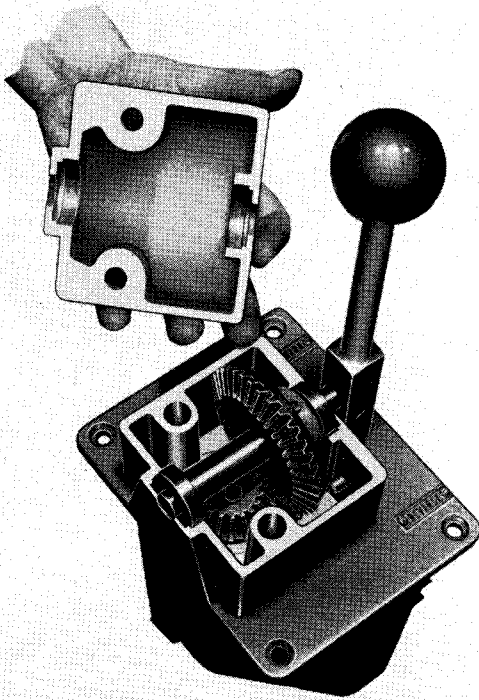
Type DM Master Switch, Top Housing Removed to Show Gearing
